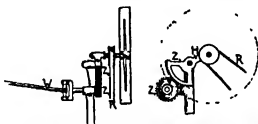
A device to obtain quick adjustment of the fan belt drive without being compelled to stop the car. *X* and *Z* are actuated by the rod *W*. *H* is firmly fastened to the sector *X*, and carries the shaft of the rotating fan, *R* is the belt. The rod *W* is controlled by a lever on the dashboard.
